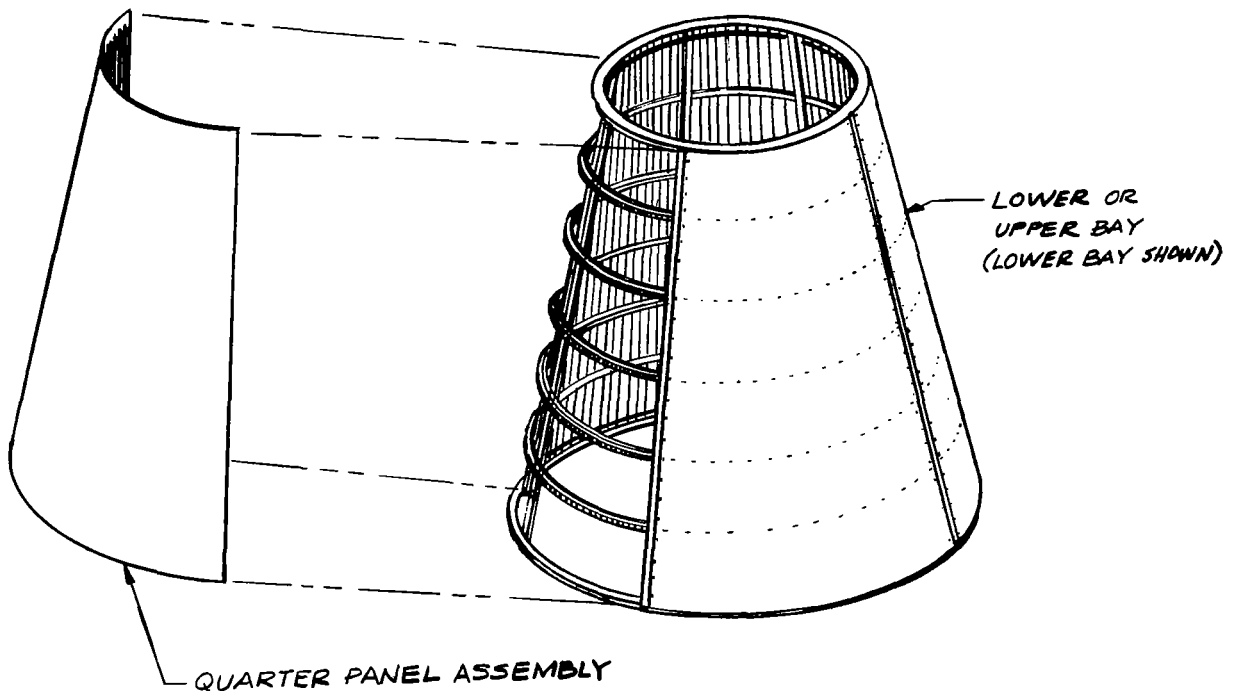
Radiator Bay Assembly (Steps 4 and 5)
